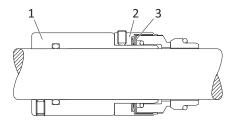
Design of the relieved mechanical seal with sinusoidal spring
